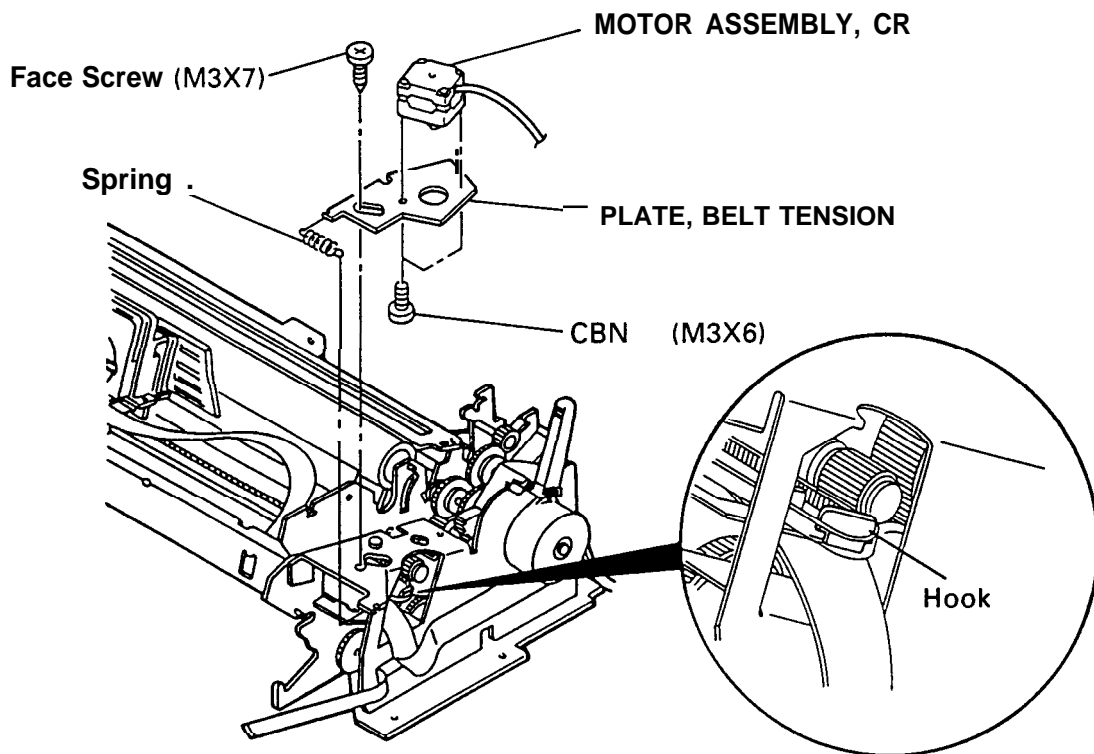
Removing the MOTOR ASSEMBLY, CR
